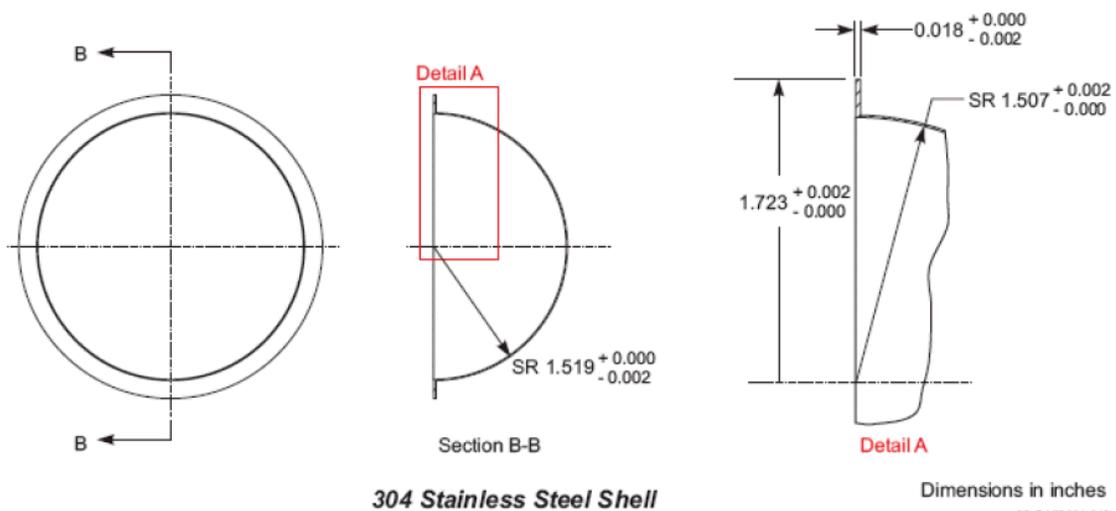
BERP Ball Stainless Steel Hemishell Drawing Showing Flange (in inches).
